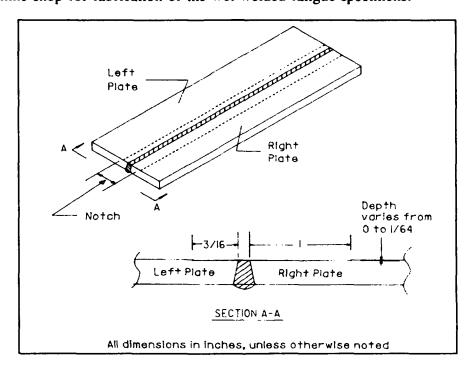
Wet Welded Fatigue Plate WW-PL1 After Removal of Backing Bar
